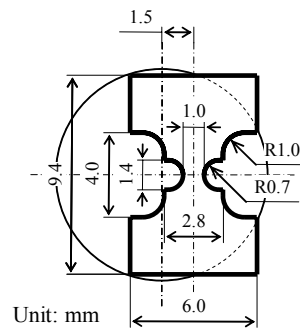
Schematic illustration of fatigue specimen shape. Miniature fatigue specimen was cut from the off-center position of HPT-processed disk.
